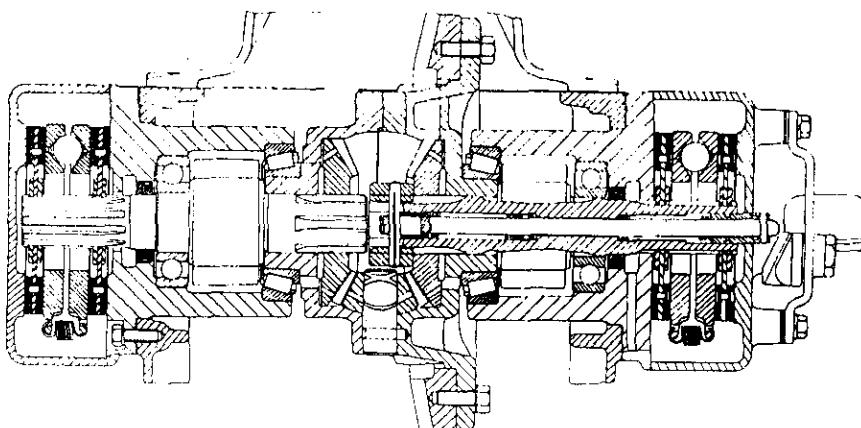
Sectional view of differential, bull pinions and brakes. Note differential lock which operates through hollow right hand bull pinion shaft.
